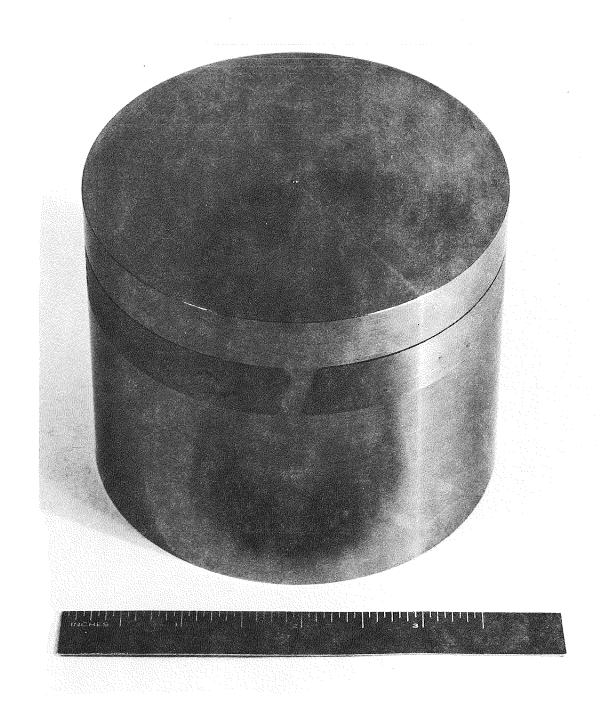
Test Sample After Clean Up Machining - Rear Shroud View
